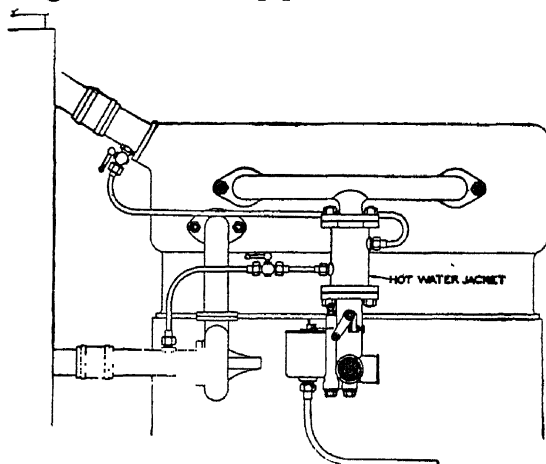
Hot Water Jacket Method of Heating the Carburettor.
